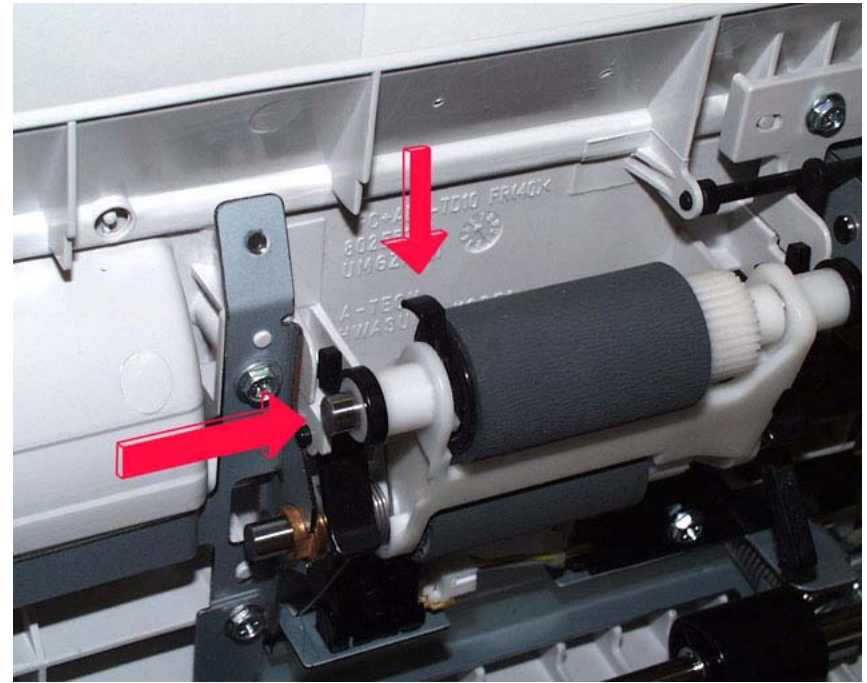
Installing the Nudger Roll, Nudger Roll shaft and locking clip
